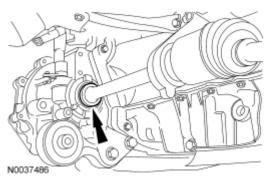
Locating RH Halfshaft Into Transaxle Courtesy of FORD MOTOR CO.
